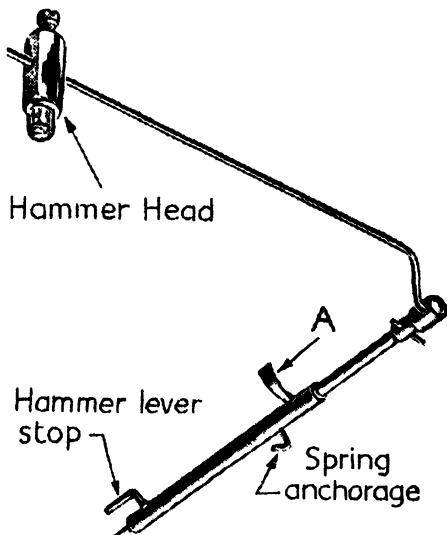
Fixed to this piece 8h is the hammer which strikes the gong. The spiked wheel fixed to 8i lifts the pin A on 8h and allows it to drop off suddenly. The attachment of this piece can be seen from Fig. 9 on the following page, which shows rod, hammer spring and hammer stop and the position it occupies in the clock.
